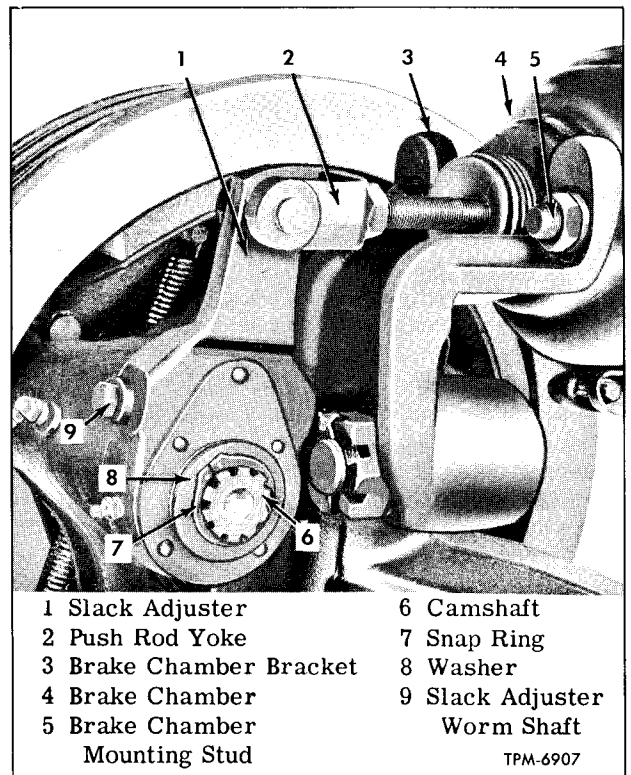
Brake Chamber, Bracket, and Slack Adjuster Mounted on Front Axle
